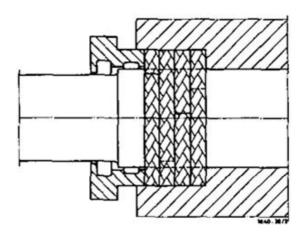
Packing rings, with their joints offset by 90° to the preceding ring.
